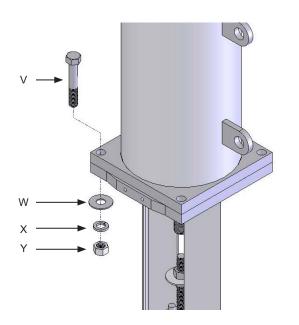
Fastening Spring Cartridge Assembly to Housing Assembly
